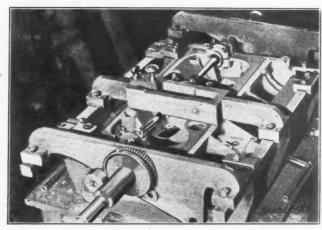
Reaming Jig for Hand Reaming Crank-shaft Bearings after the Boring Operation
